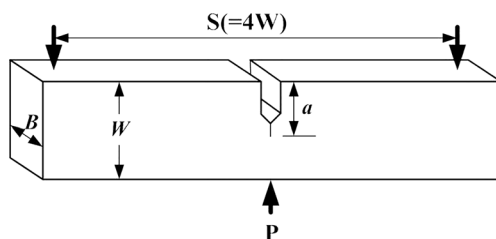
Geometry of the SENB specimen used in the fracture test, according to ASTM E1820:09
